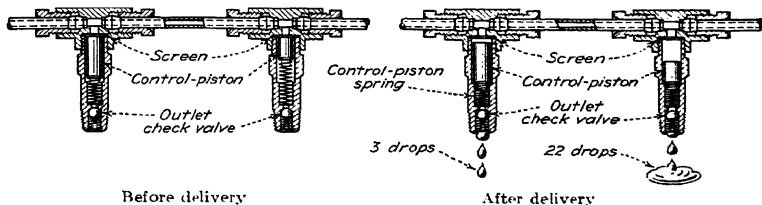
Measuring valve and pump for system, Fig. 135.
